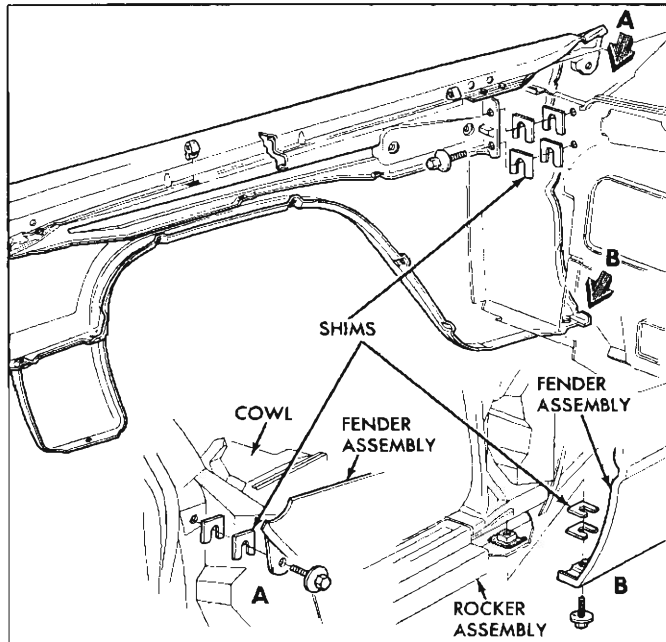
Fender to Cowl and Rocker Panel Shimming
